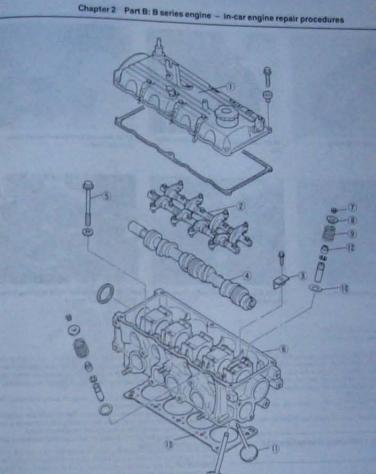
Exploded view of the cylinder head components (Secs 17, 19, 20 and 22)
